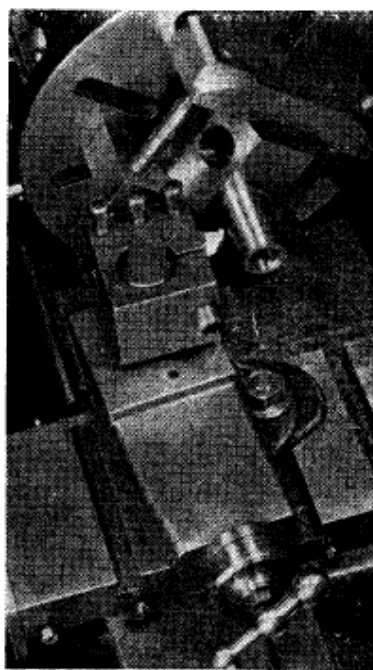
The main block held for skew facing, boring and threading, and for finishing the extension piece
